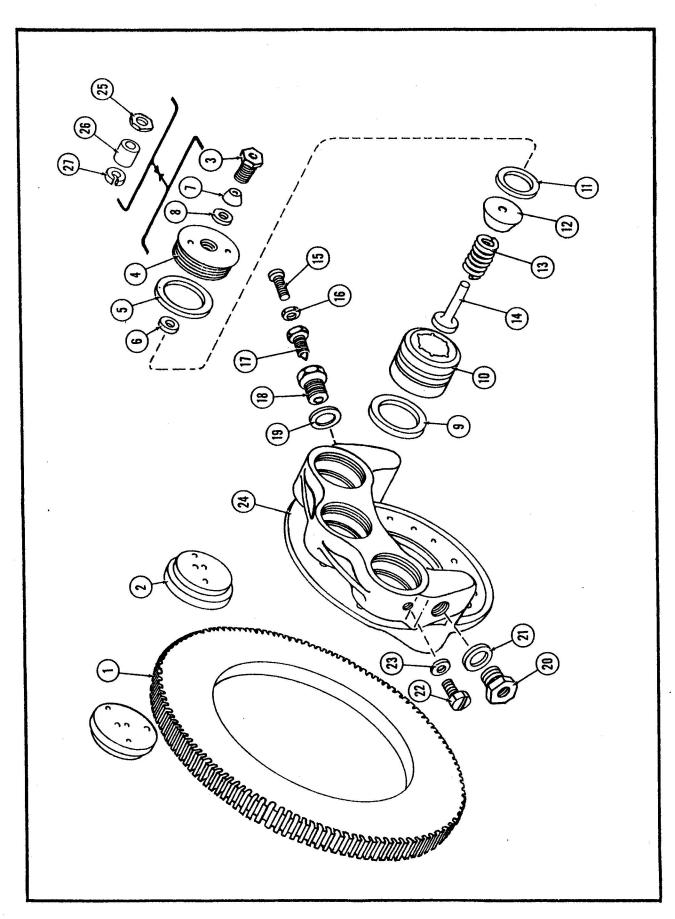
Brake Assembly 530886SG for 11.00-12 Wheel
